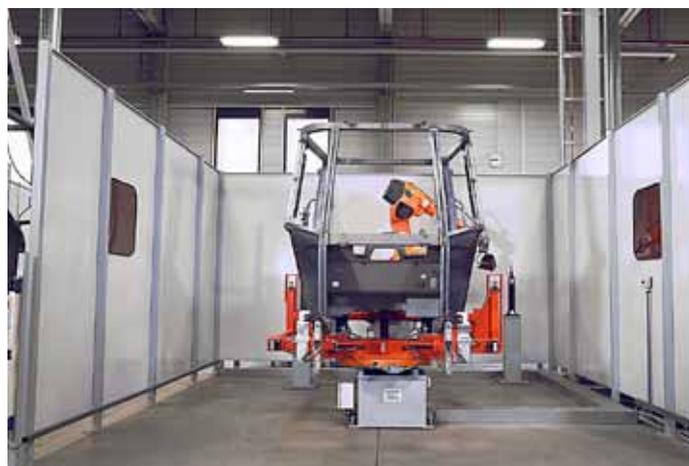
After the welding process, a CLOOS QIROX robot checks the quality of the finished tractor cabs.
